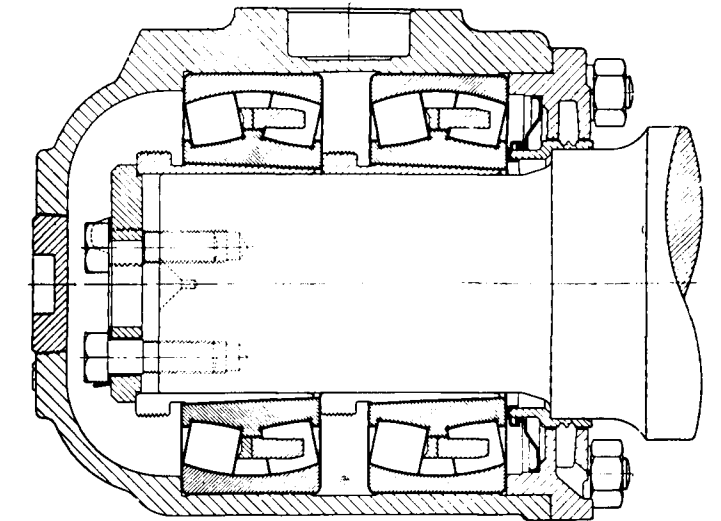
Roller bearing axlebox fitted with two spherical roller bearings for four-wheel goods wagons.
